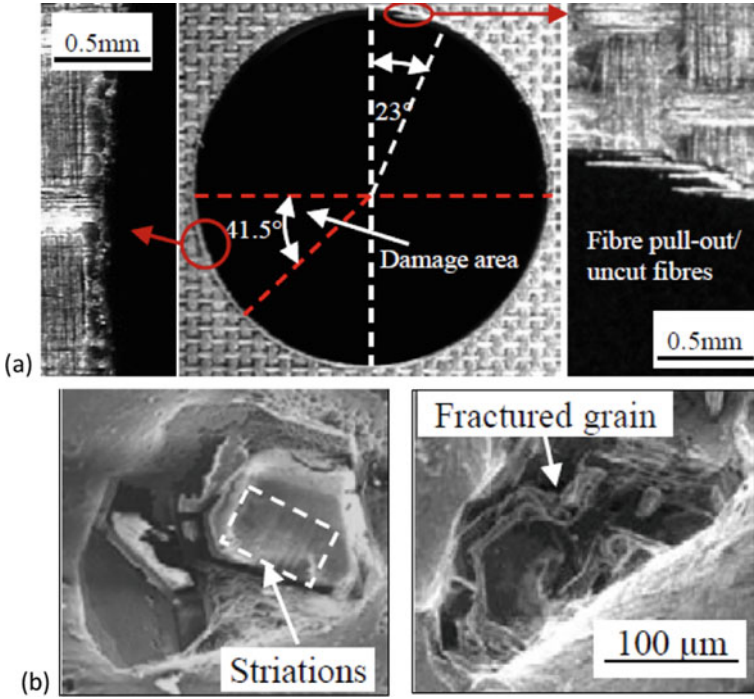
Results for OD with a 60-grit single-layer ball-end diamond tool: a Fibre pull-out/uncut fibres, and fuzzing, and b grain attrition wear and fracture [40]
